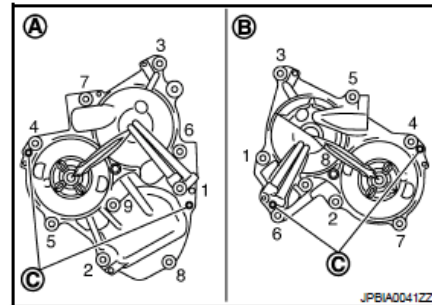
Identifying Mounting Bolts Tightening Sequence
